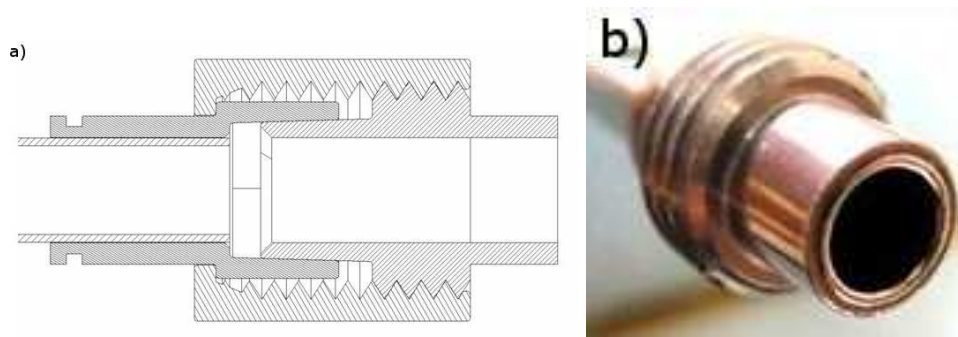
(a) Concept for tapered aluminum, metal-to-metal fitting; (b) fitting with welded aluminum pipe.
